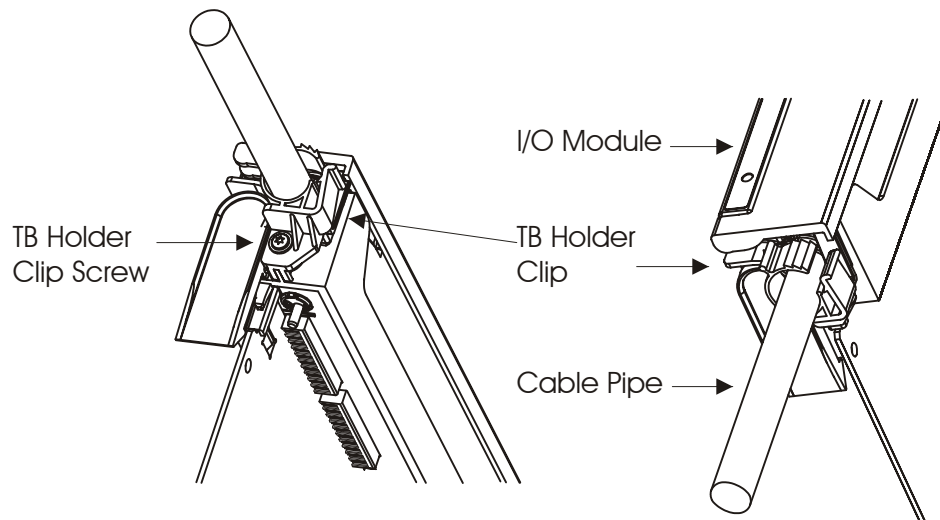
I/O Module with Terminal Block (TB) Holder Clip
